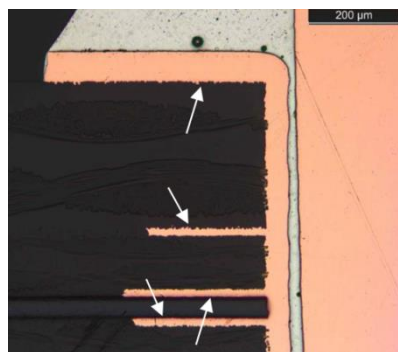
Example of material supplier treatment side of foil (white arrows) and PCB manufacturer treatment side of foil (opposite side)
